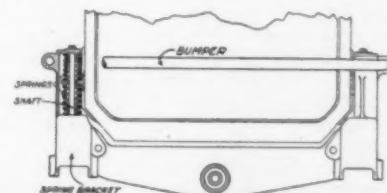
Combined Enclosed Spring With Front Hanger Brackets
